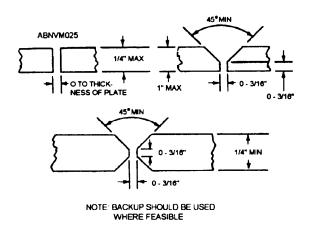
Single-vee and double-vee groove welds.
